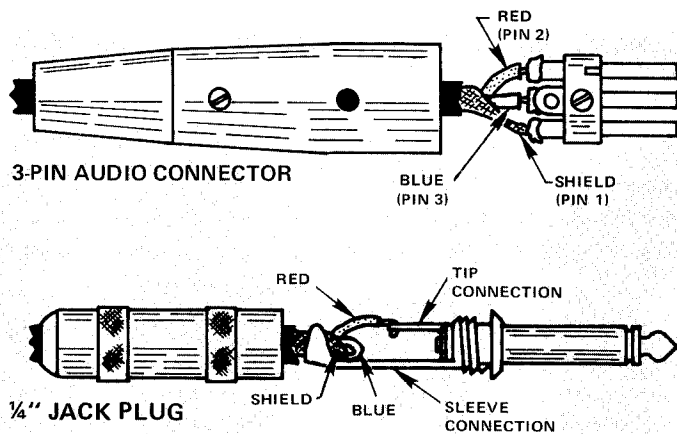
3-Pin Connector & 1/4" Jack Plug Wiring Connections
